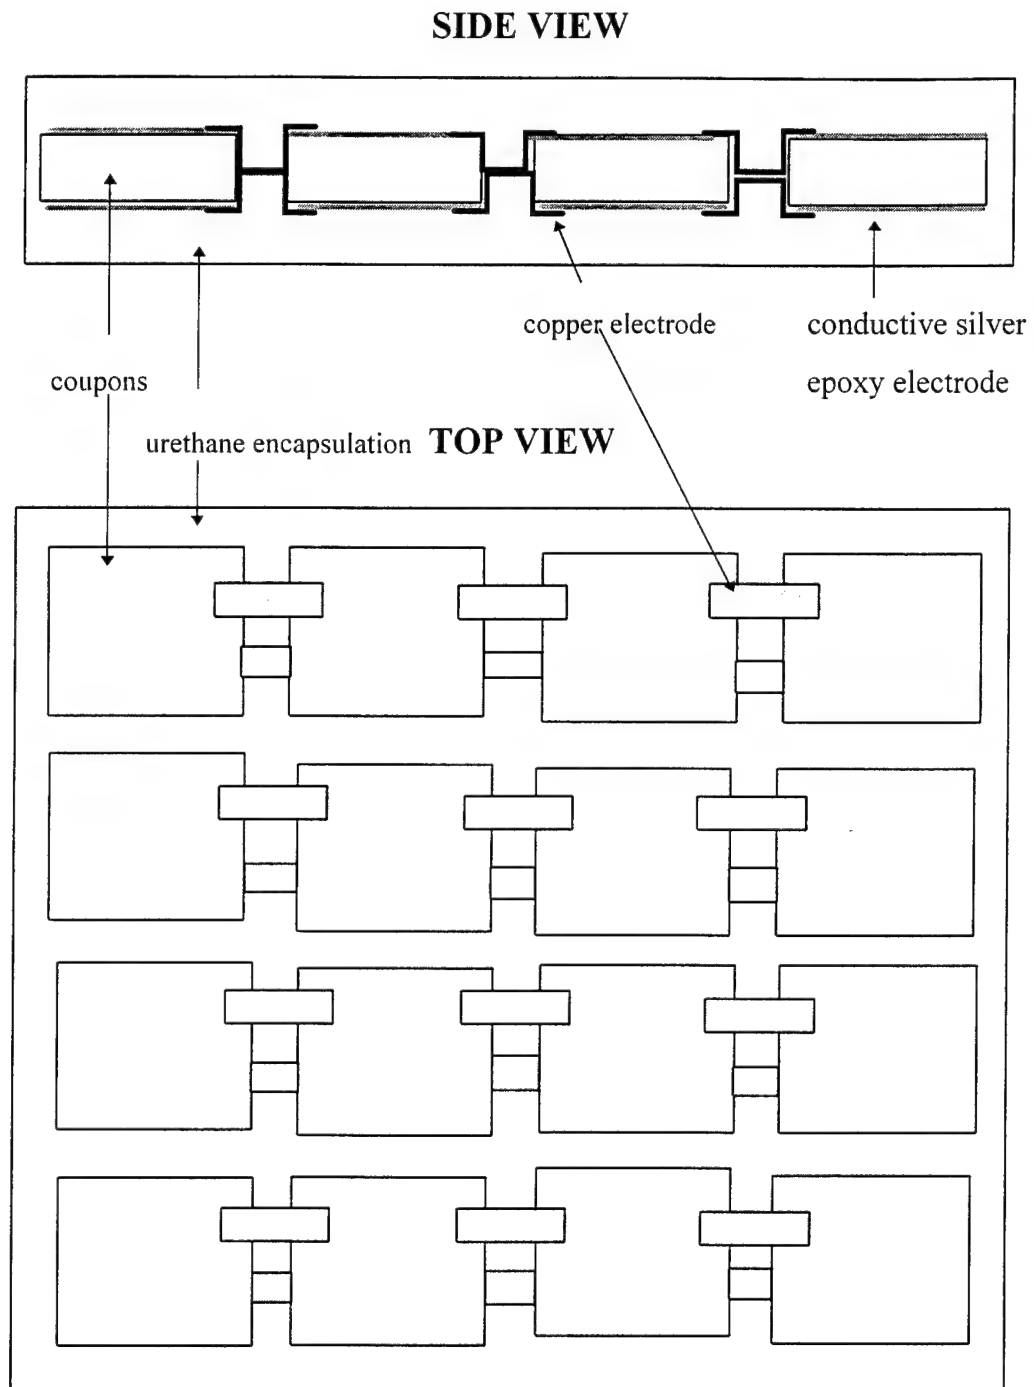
Side view and top view of array assembly showing the copper electrode arrangement.
